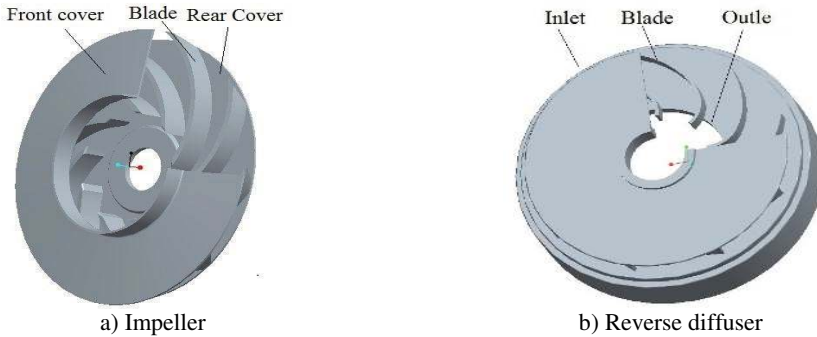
Three-dimensional diagram of impeller and reverse diffuser
